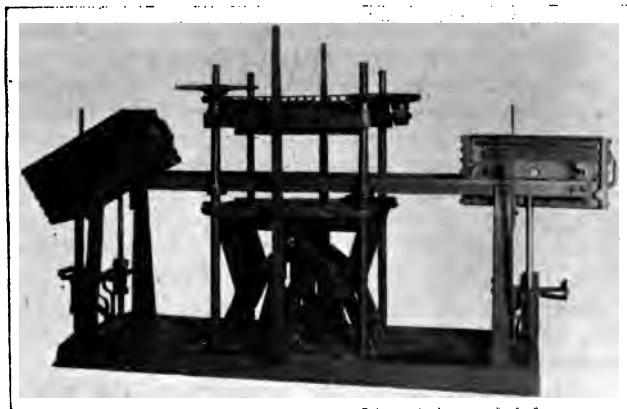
HAND OPERATED, DOUBLE END, PRESSURE BLOCK MACHINE
